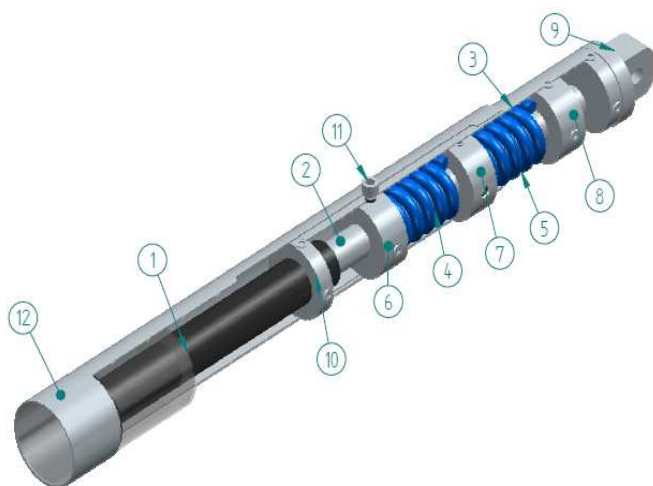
Actuator's components: (1) hydraulic cylinder; (2) movable rod; (3) base tube; (4) and (5) springs; (6), (7) and (8) guides; (9) load terminal; (10) connection guide; (11) guide bolt; (12) encapsulation tube.
